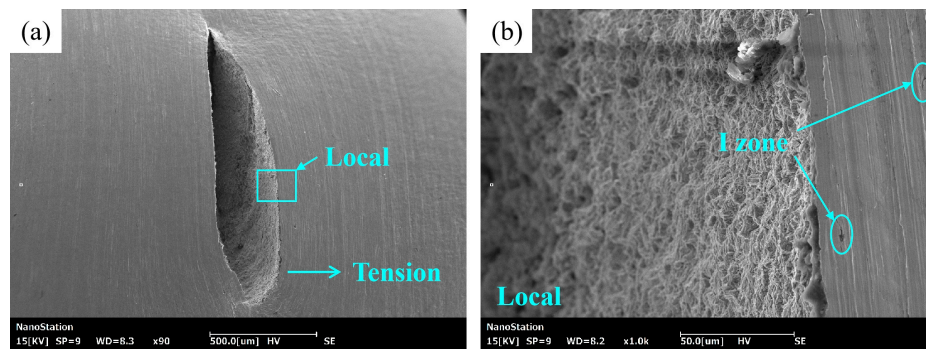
(a) Side crack and (b) magnified view of the local area of the fatigue specimen.
